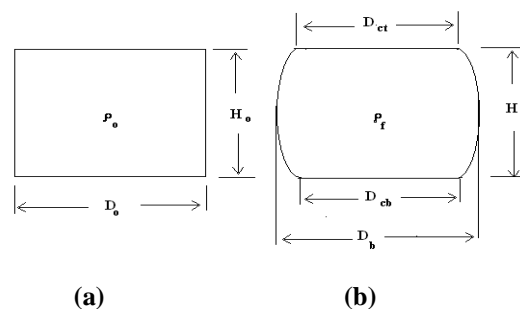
Initial (a) Sintered Preform, and, (b) Sintered, but, Forged Disc.
